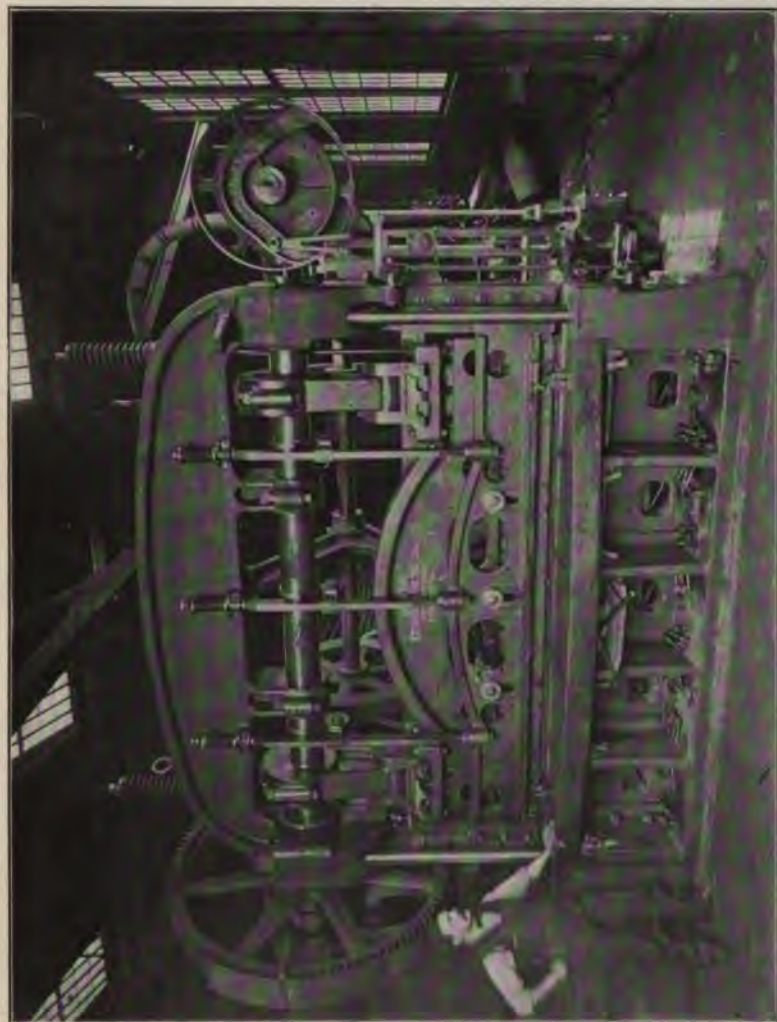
MACHINE FOR CUTTING EXPANDED METAL.
